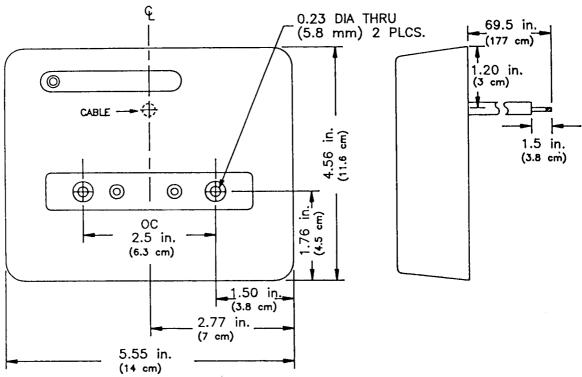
C: ACCESS 4310/4312 CARD READER MOUNTING DIMENSIONS
